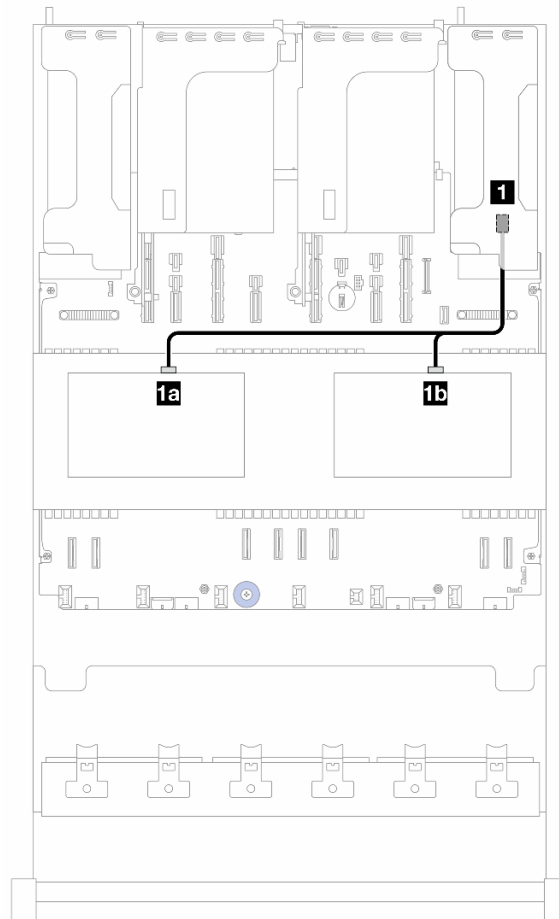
Cable routing from middle backplanes to SFF 16i adapter
